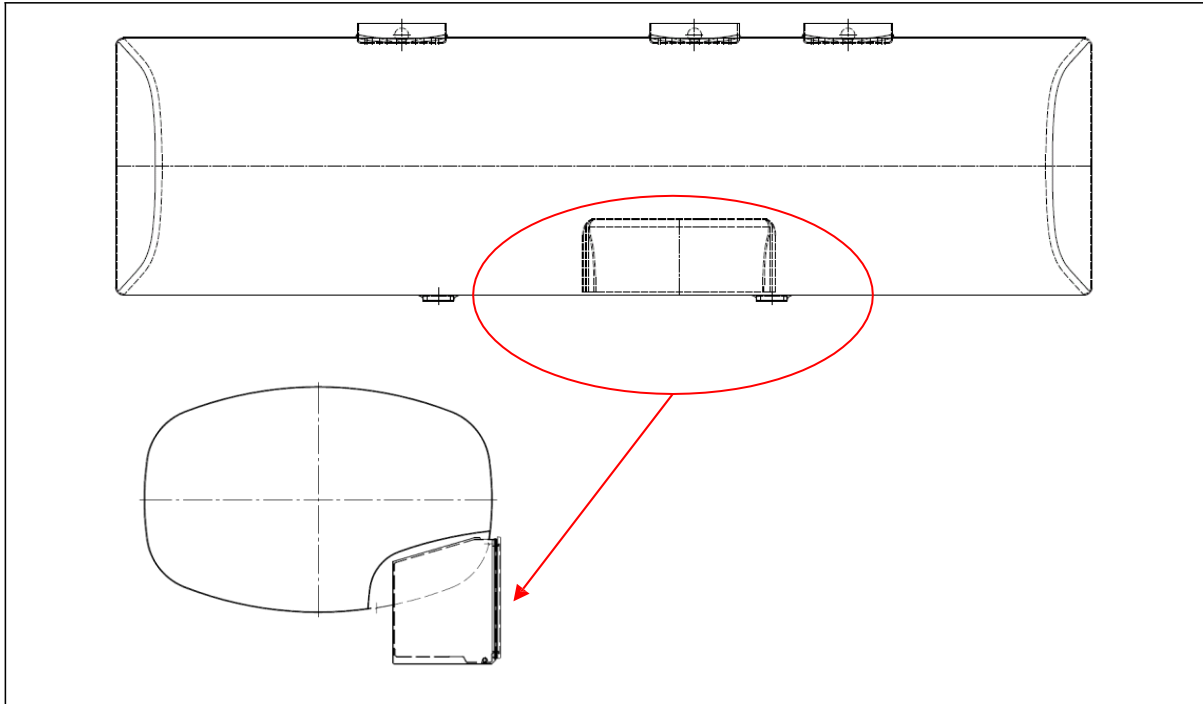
Box-shaped tank with cutout for the fittings cabinet
